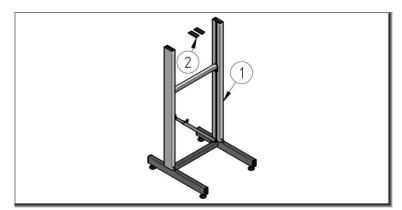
Assembly of the support – HE 020/ HM 140 $\,$
